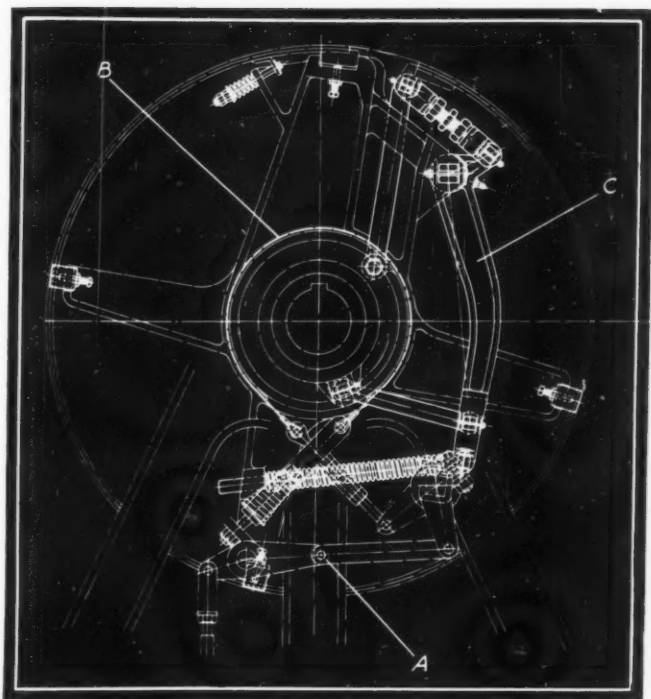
The auxiliary brake sets in operation the mechanism of the internal expanding clutch of the rope drum
